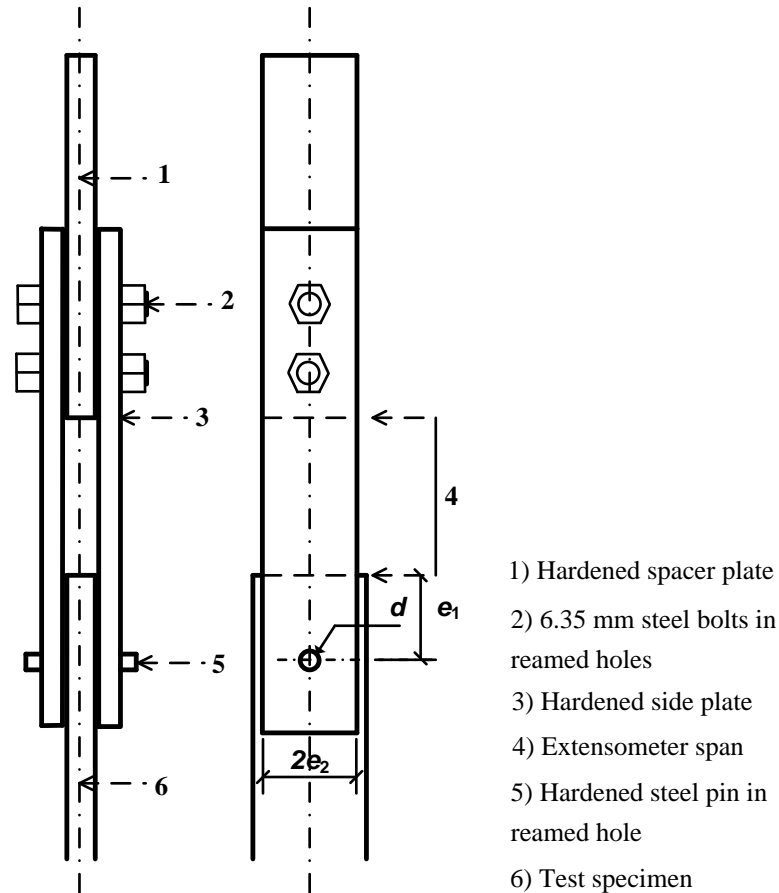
Steel tension loading fixture and FRP test specimen for ASTM D 953-02 (2002).
